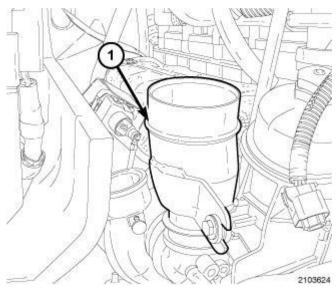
Turbocharger Inlet Elbow Courtesy of CHRYSLER LLC
